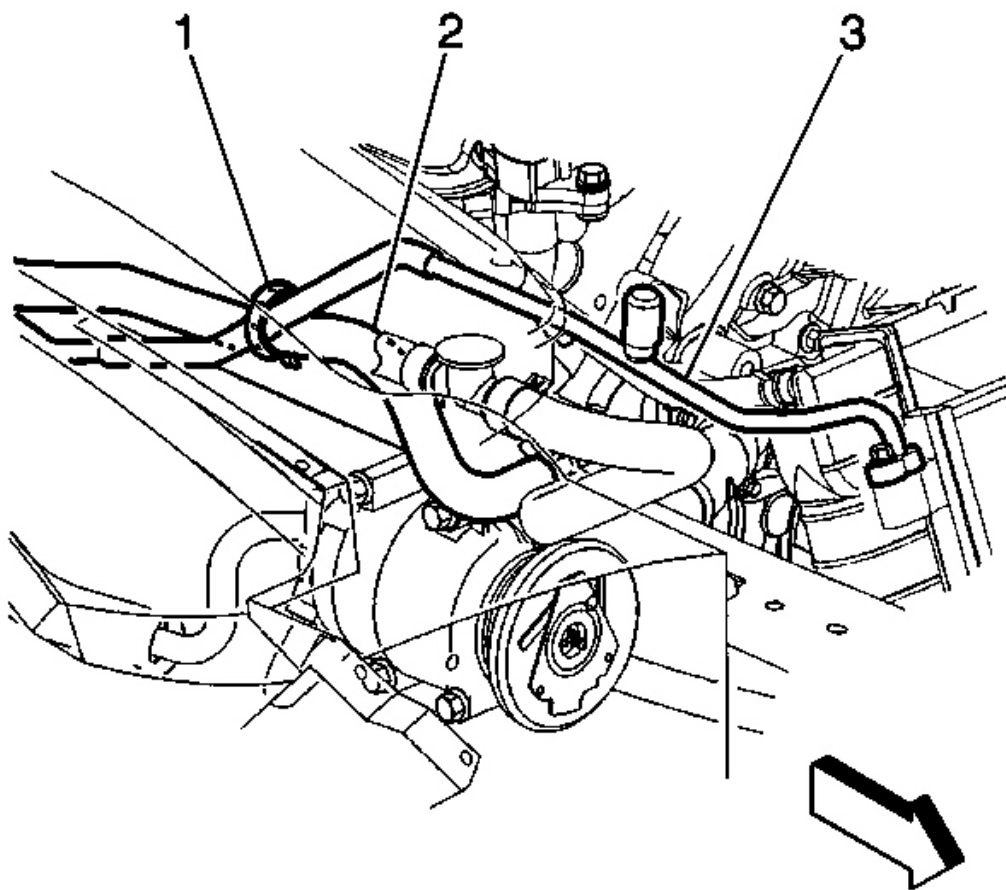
Front Evaporator Tube, Heater Inlet Hose & Retaining Strap
